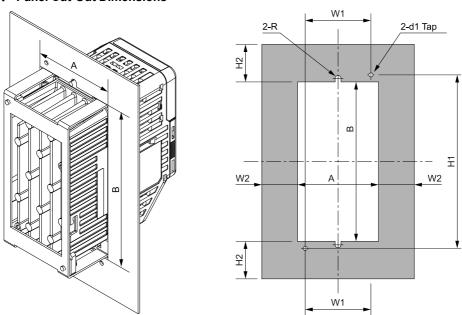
Panel Cut-Out Dimensions Diagram 1
